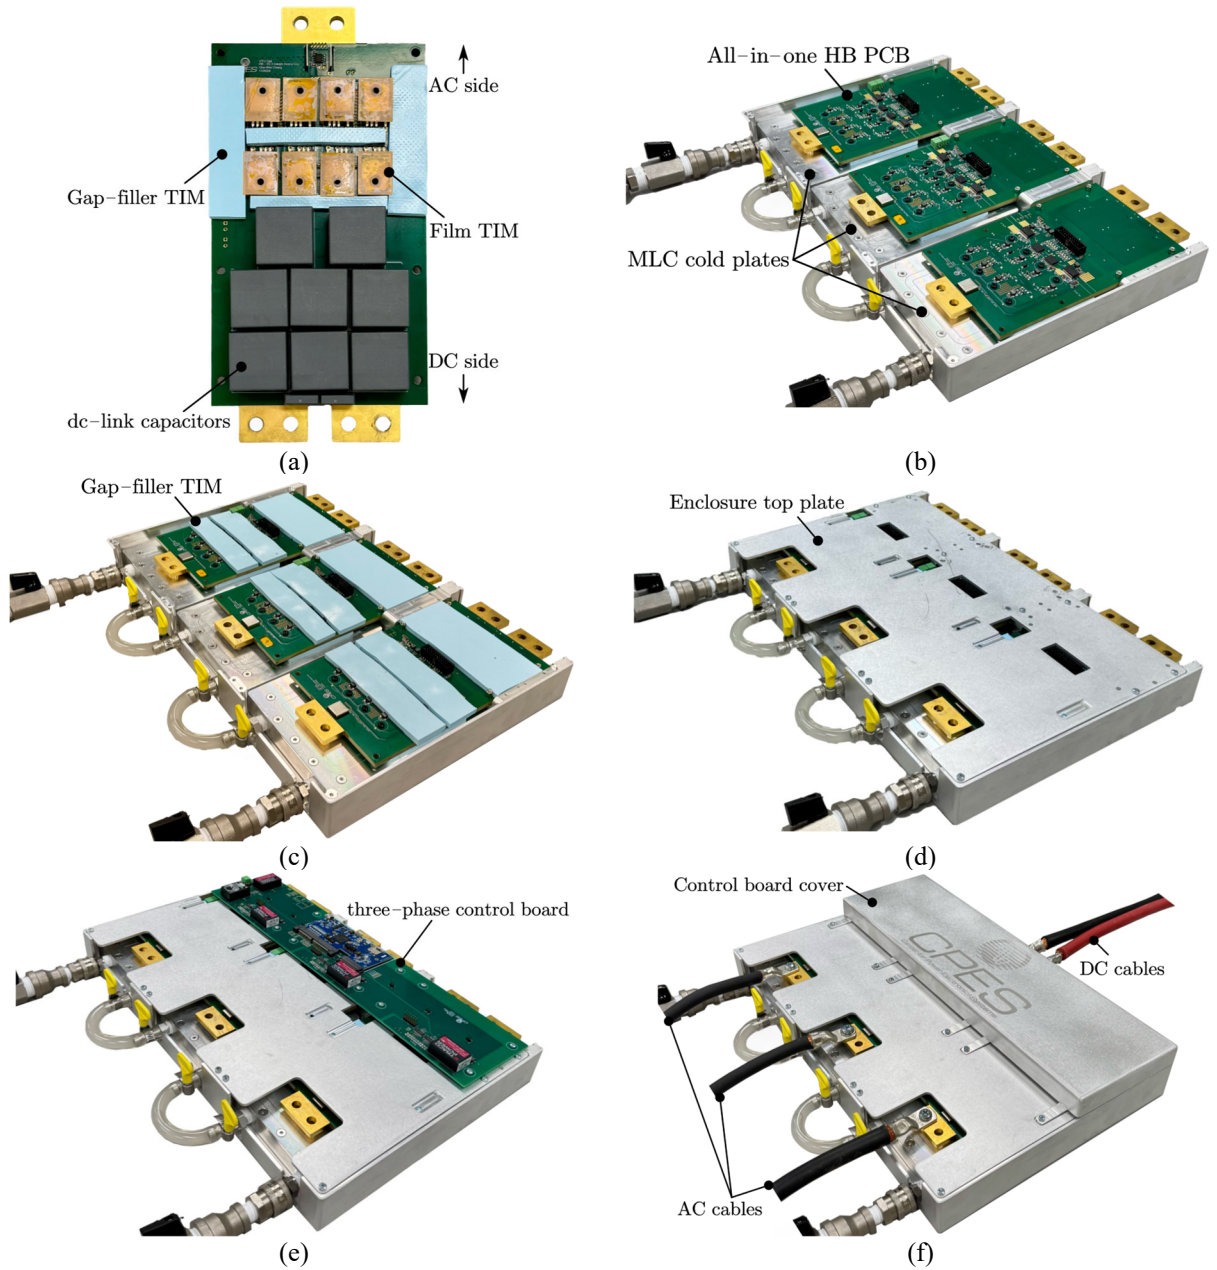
Detailed assembly process of the demonstrated 200 kW three-phase inverter (a) all-in-one HB PCB with gap-filler TIM for PCB and film TIM for power devices, (b) mount PCBs onto MLC cold plates, (c) apply gap-filler TIM on top surface of PCB, (d) close and apply pressure from enclosure top plate, (e) connect 3-phase control board, and (f) install cables and cover.
